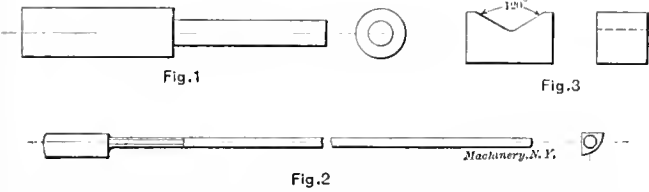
to 3. Example of Work, and Tools for "Breaking Down" Forgings.
